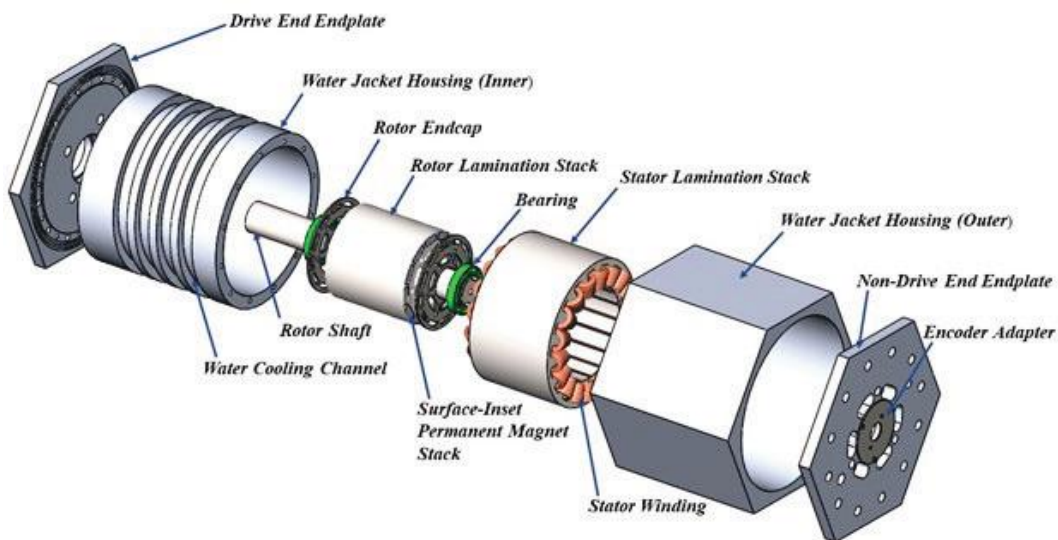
Exploded view of the prototype integrated machine drive 3D assembly model
